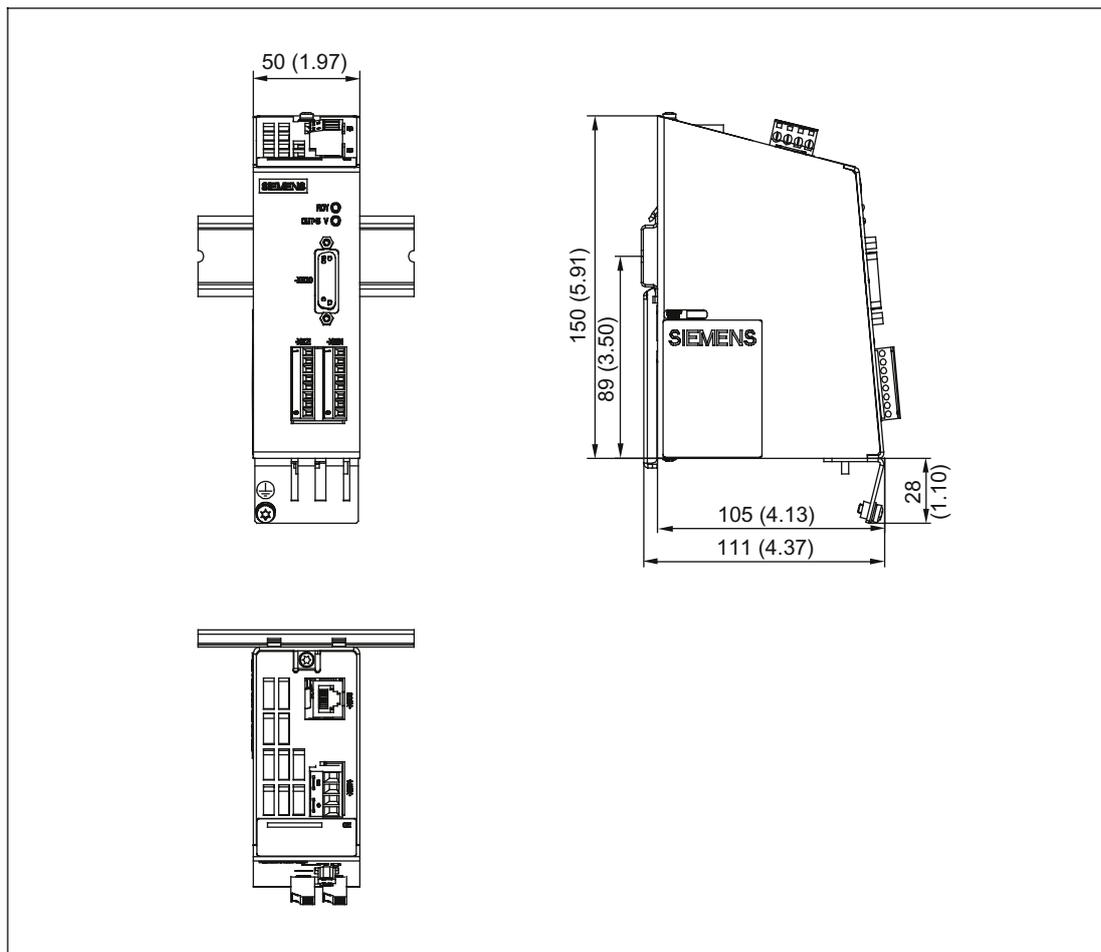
Dimension drawing SMC30: 50 mm wide
